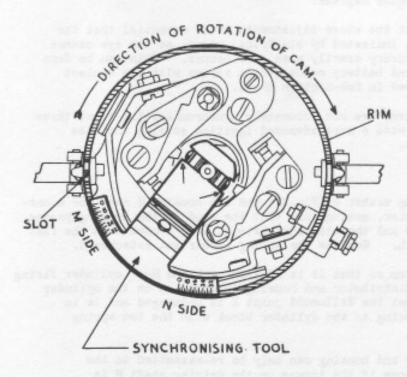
SYNCHRONISING TOOL IN POSITION.
